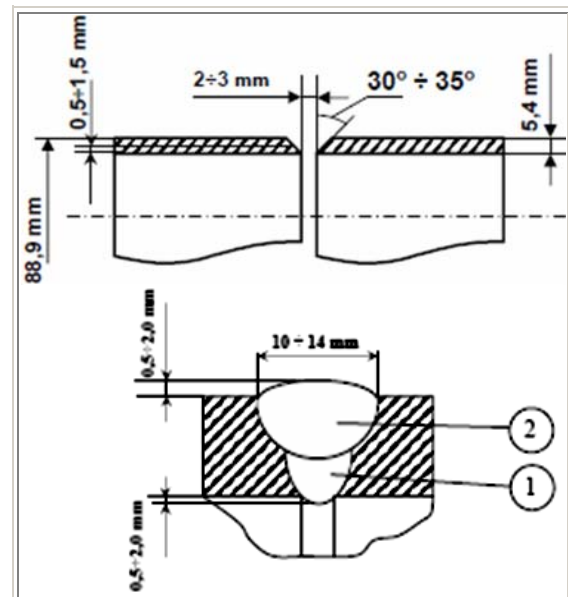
Sketch of weld preparation details (joint design) and welding sequence of the pipe with outside $\varnothing 88.9$ mm and thickness 5,4 mm TIG welding: 1 – 1st run, 2 – 2nd run
